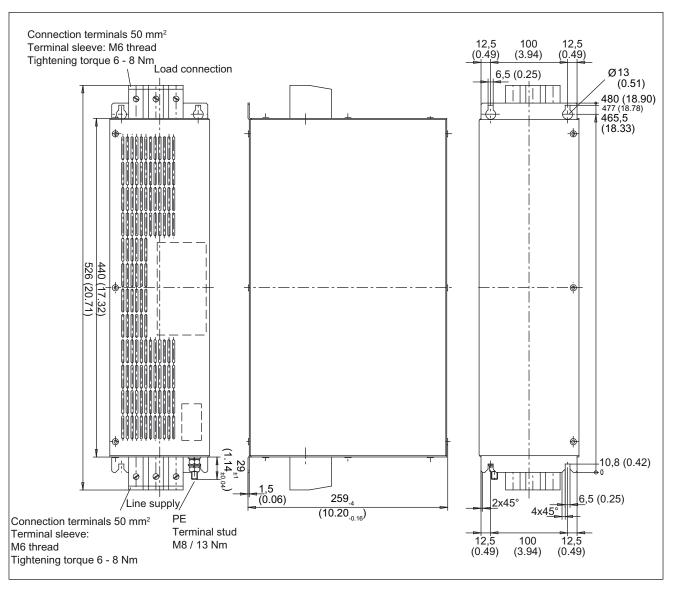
Dimension drawing of Wideband Line Filter 55 kW for Active Lines Modules, all dimensions in mm and (inches)
